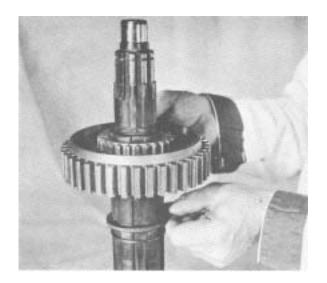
Install 2nd speed gear retainer ring, locating washer, and 2nd speed gear on mainshaft. (NOTE: clutching teeth are up.)
